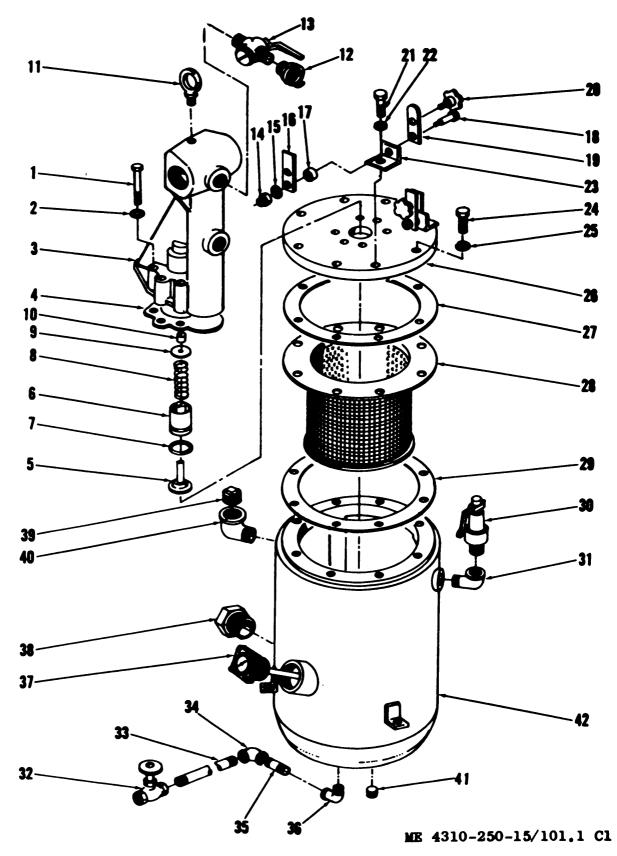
Oil separator assembly, disassembly and reaassembly, Model 6M250RPV.
